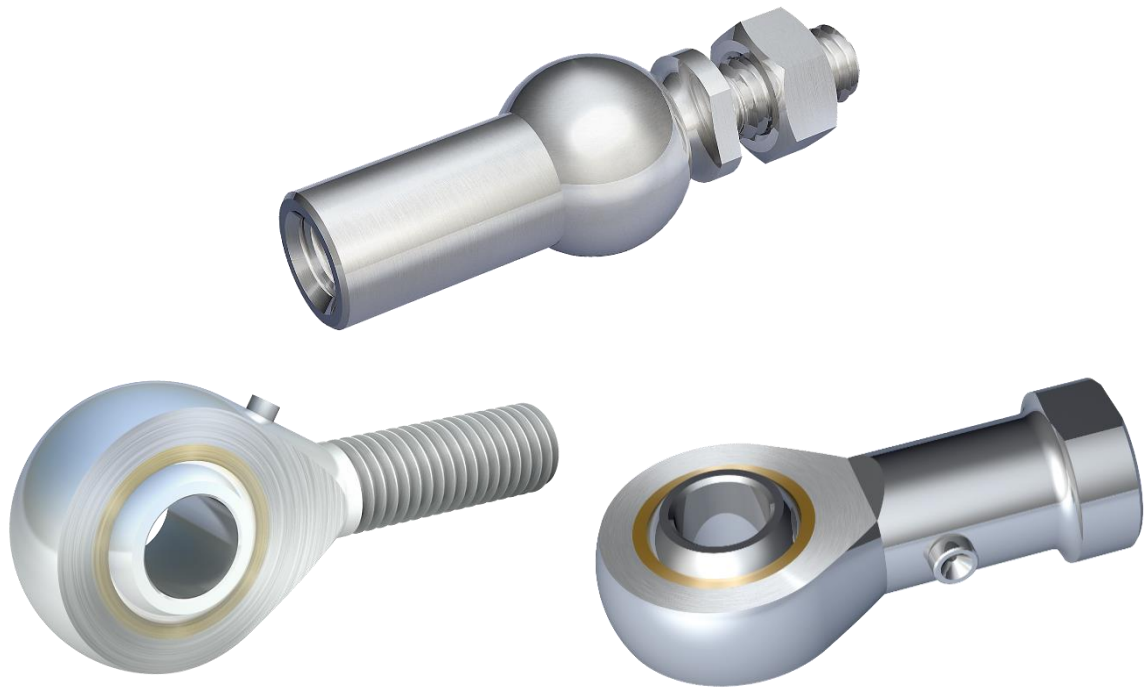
Spherical joints. (Up) Axial Joint. (Down, left) Rod end male thread. (Down, right) Rod end female thread [mbo]
